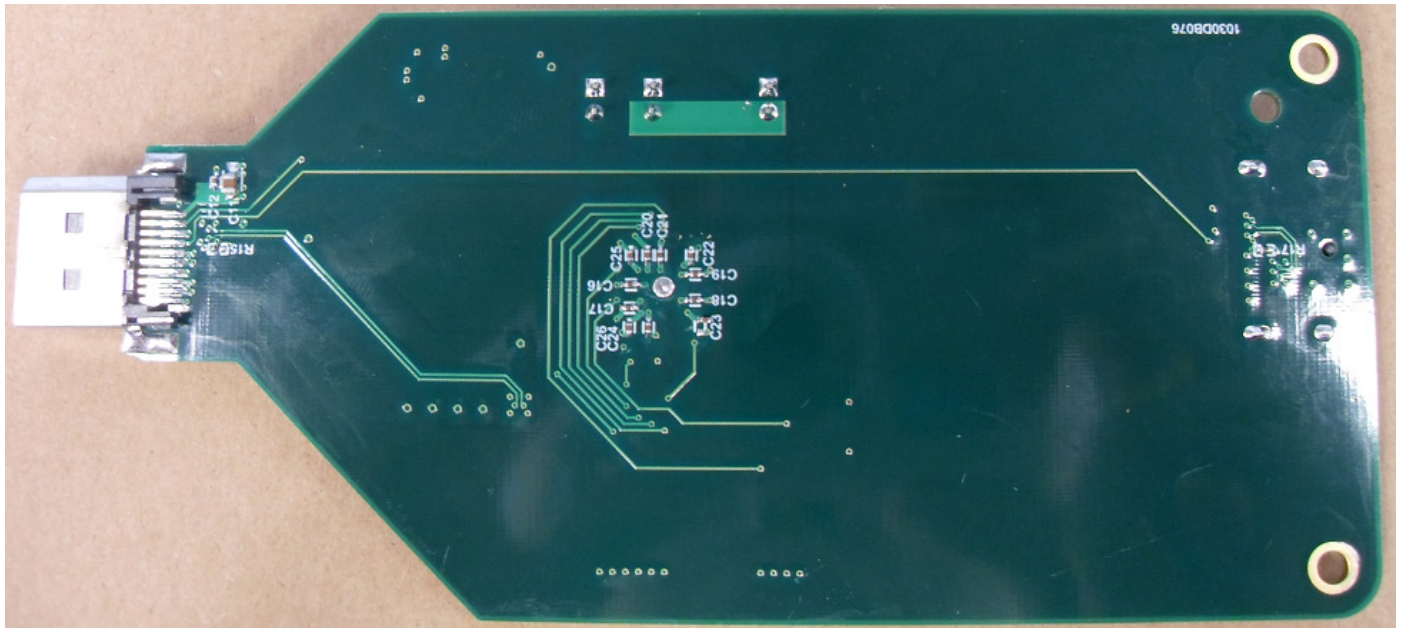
Bottom View of PI3EQXDP1201 Demo Board Rev.A
